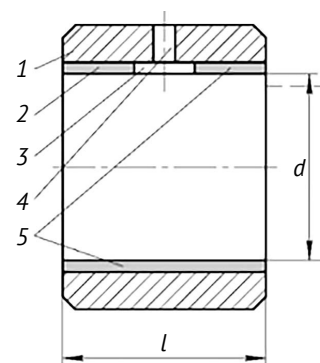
Design of a conventional sliding bearing and a rotating section of a shaft loaded with a radial force
